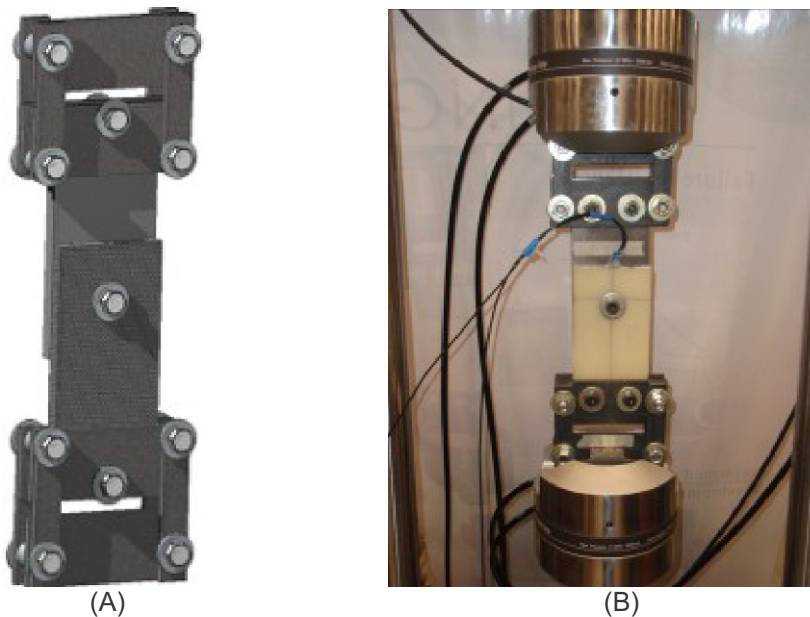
(A) Mechanical mounting device, (B) Specimen loaded into MTS
